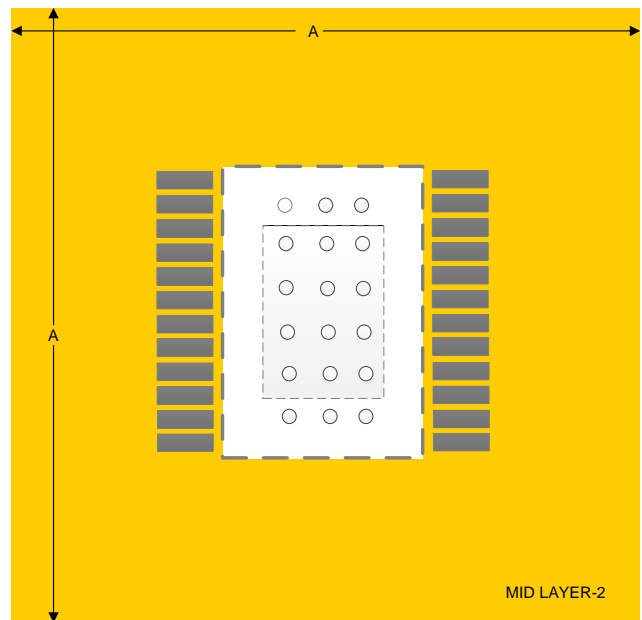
PCB - Mid Layer-2 (4-Layer PCB)
